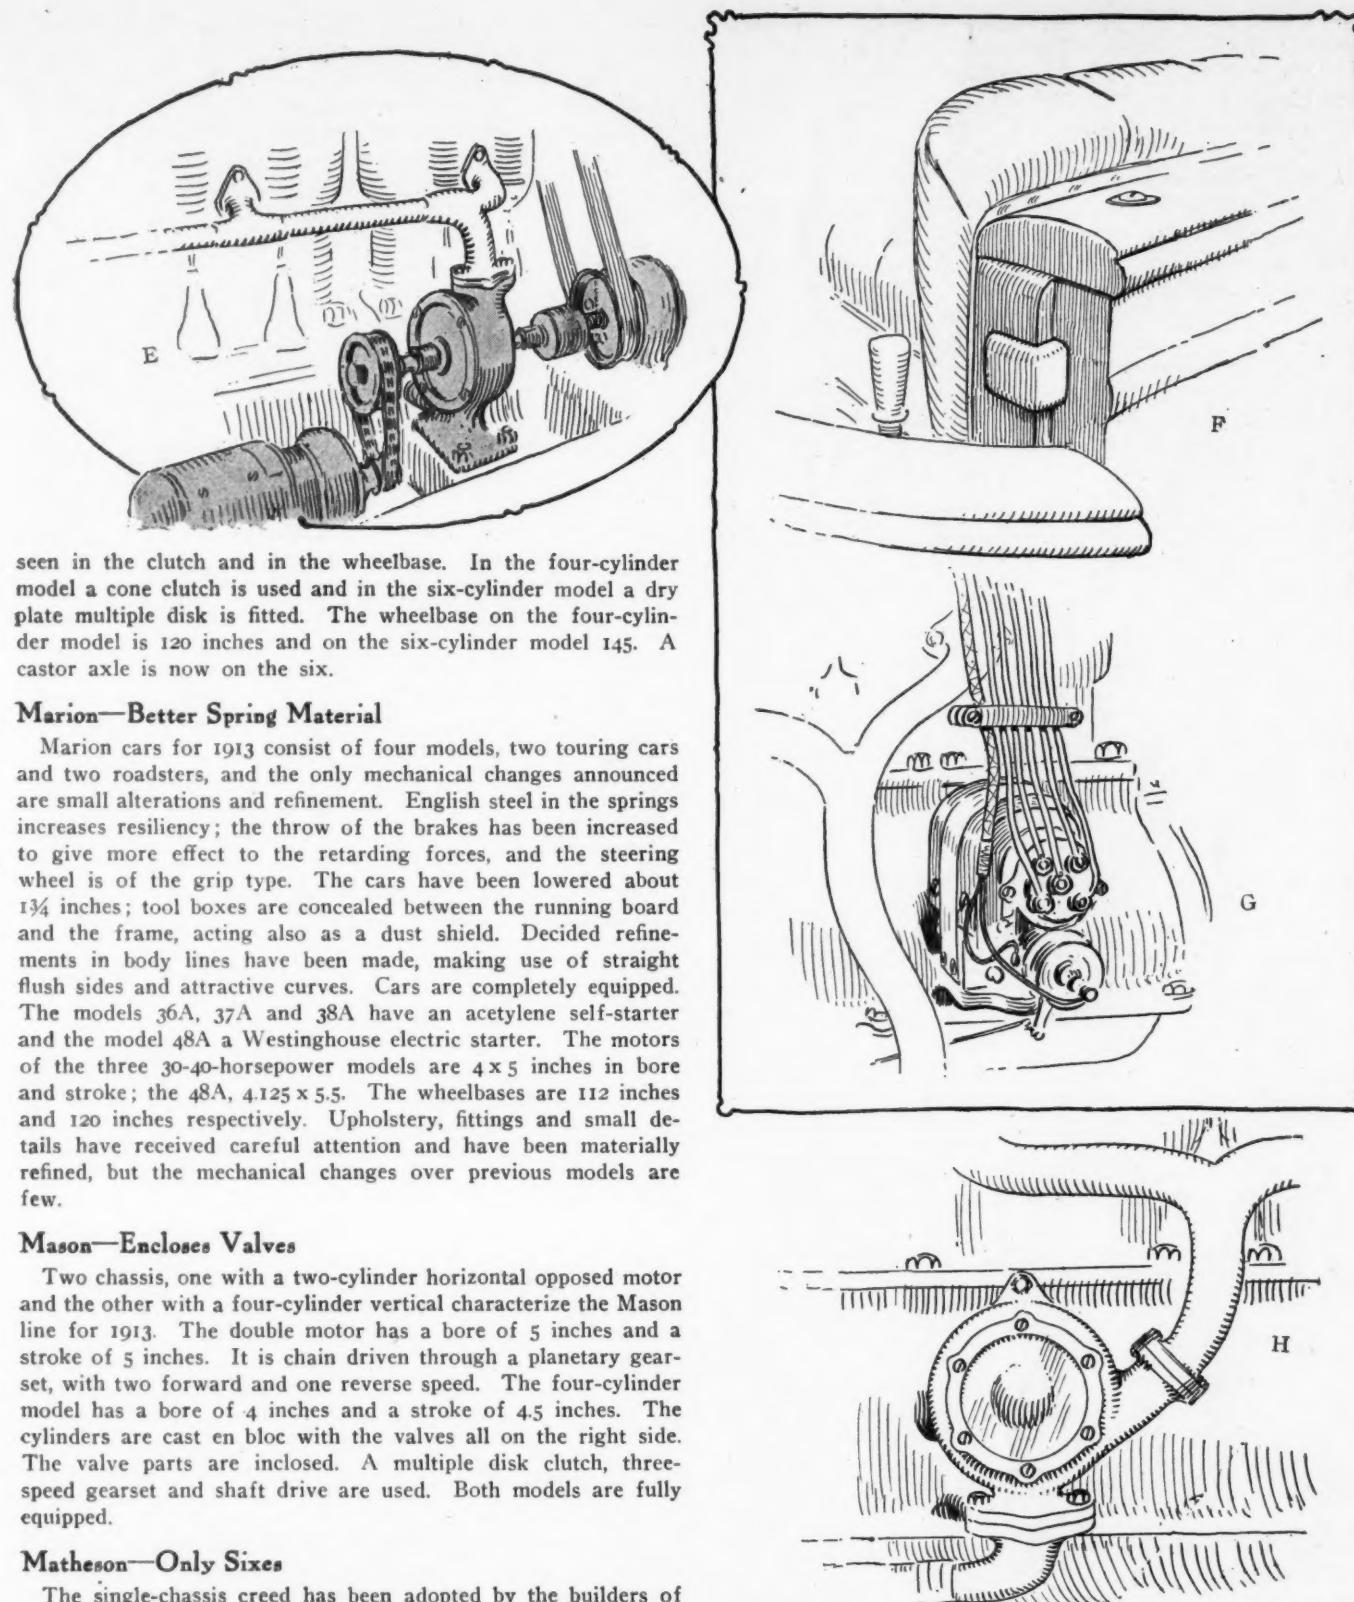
E, Generator pump and fan drive arrangement on the side of the Lozier crankcase. Note fan casting fastened to crankcase arm
